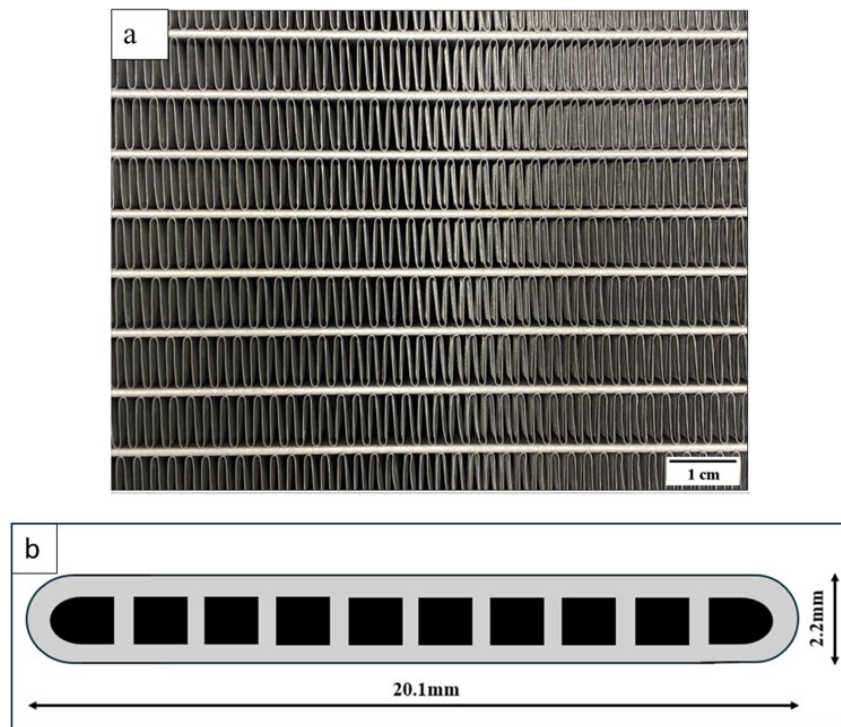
a) Section of a typical brazed heat exchanger, and b) schematic of the MPE tube profile extruded in this work
